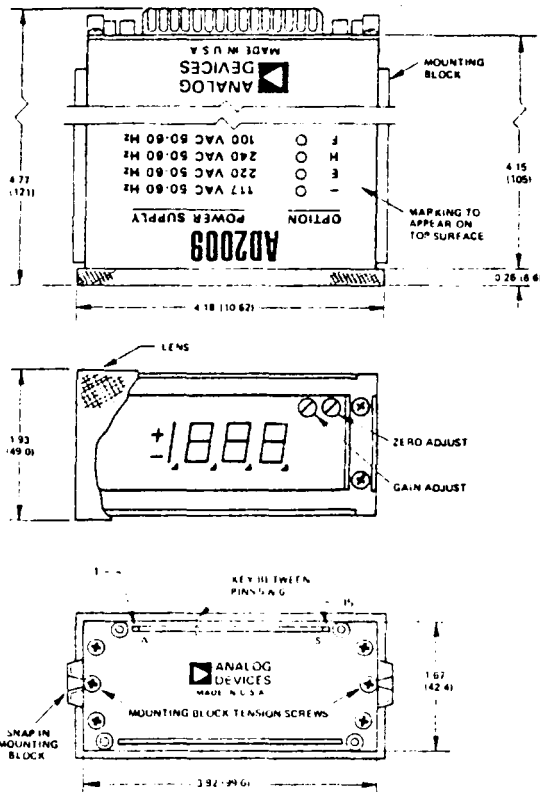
AD2009 Mechanical Outline (Dimensions shown in inches and (mm))
